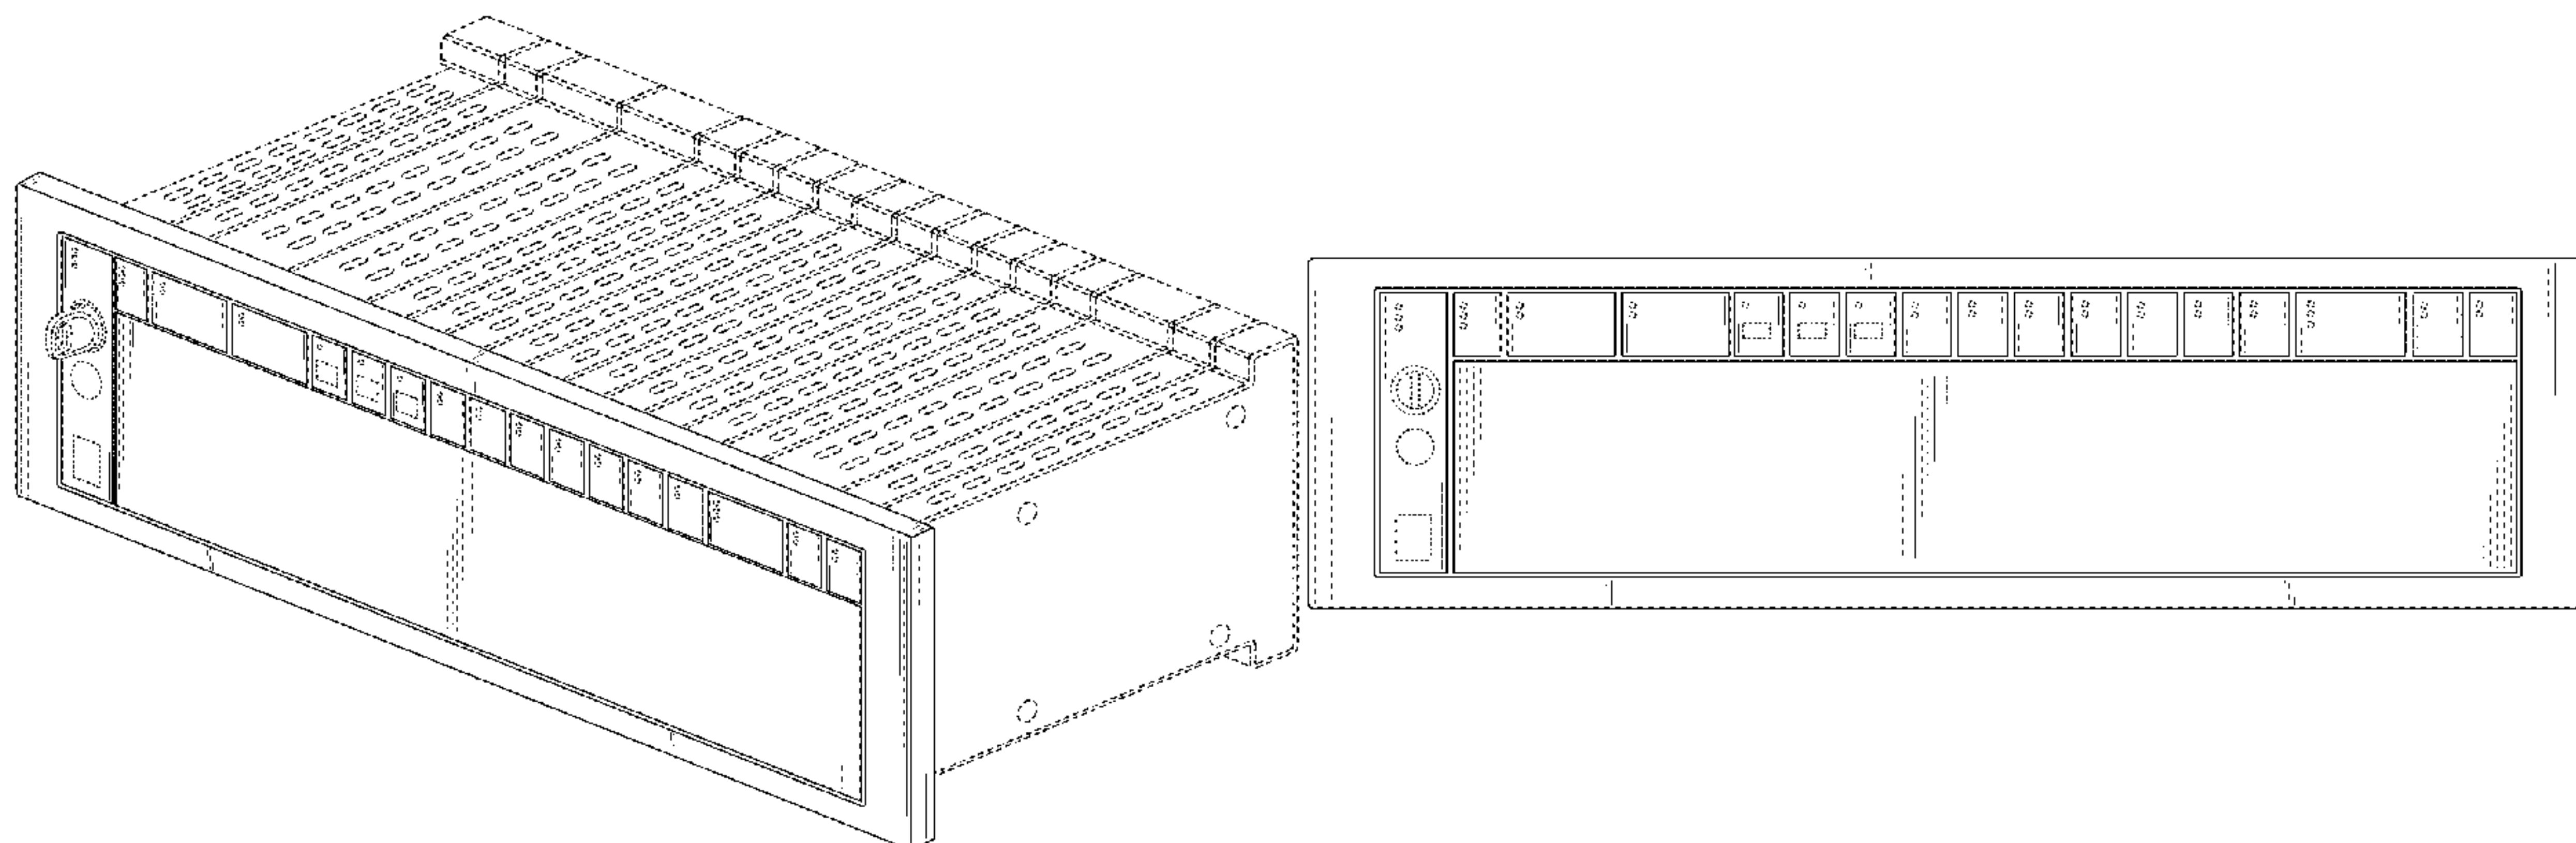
is a front-facing perspective view of another instrument panel showing a fourth embodiment of our design; FIG. 26 is a rear-facing perspective view of the instrument panel of FIG. 25; FIG. 27 is a rear-facing, exploded perspective view of the instrument panel of FIG. 25; FIG. 28 is a front view of the instrument panel of FIG. 25; FIG. 29 is a top view of the card module of FIG. 25; FIG. 30 is a bottom view of the card module of FIG. 25; FIG. 31 is a left view of the card module of FIG. 25; and, FIG. 32 is a right view of the card module of FIG. 25. The broken lines showing an electronic device are included for the purpose of illustrating environmental structure and form no part of the claimed design.
